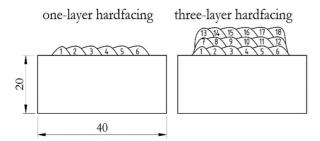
Scheme of TIG welding for a one-layer and three-layer hardfacing
